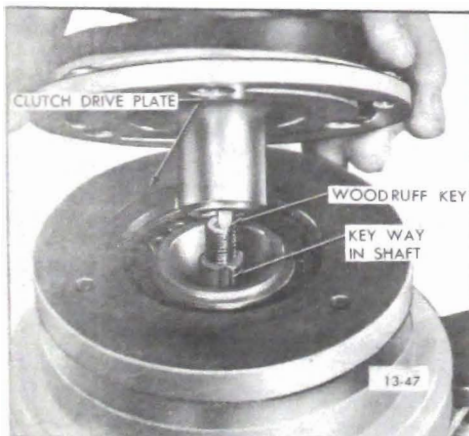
Positioning Clutch Drive Plate on Shaft
